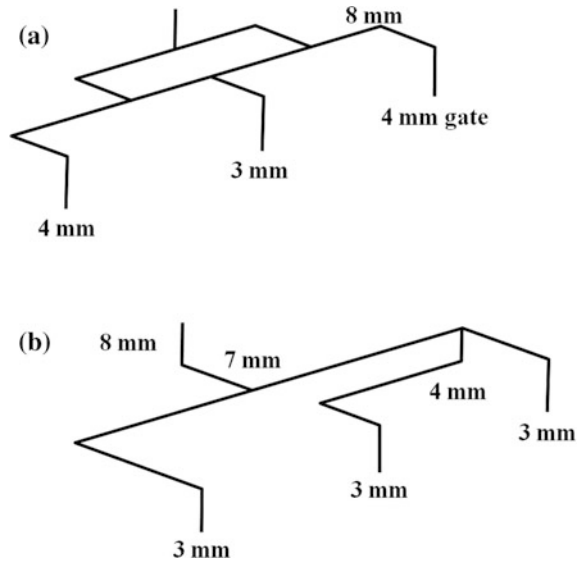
Arrangement of runners in a family mold; a conventional design approach, b using Moldflow CAD
